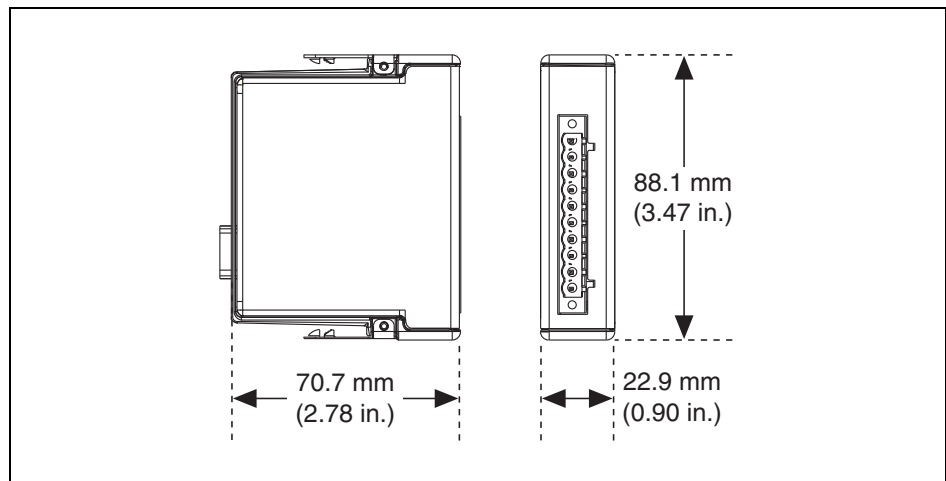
C Series I/O Module, Front and Side View with Dimensions
